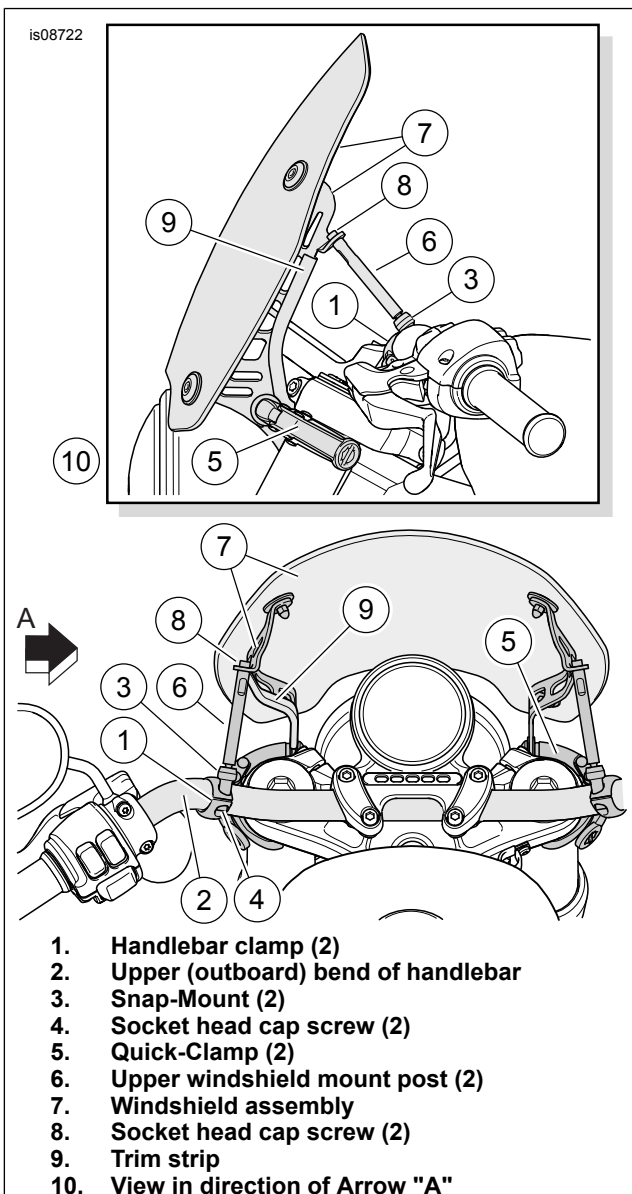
Windshield Clamps to Handlebar and Fork Tubes
